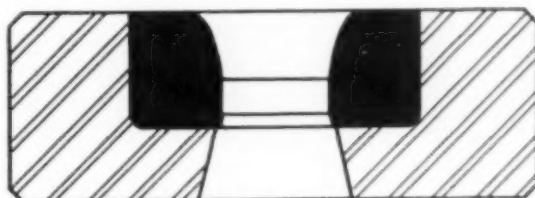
(above) — Dies for Intermediate Drawing Operations, Especially When the Draw Is Performed in a Single Stroke Through a Pair of Dies, One Above Another. Fig. 3 (below) — shouldering and tapering dies
